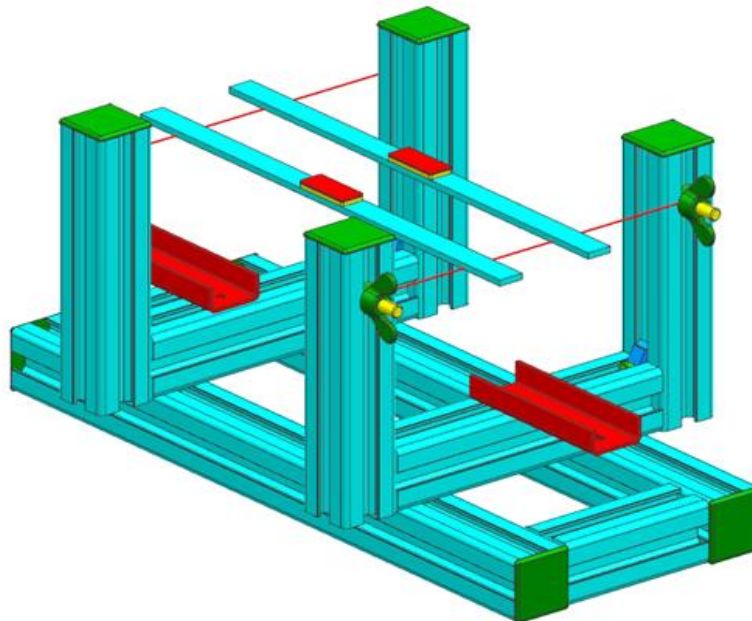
3D drawing of the holder structure along with a pair of specimens [18]
